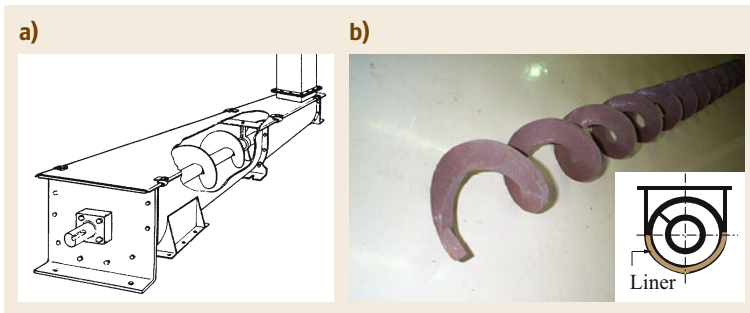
(a) U-shaped trough-type screw conveyor, (b) shaftless screw
